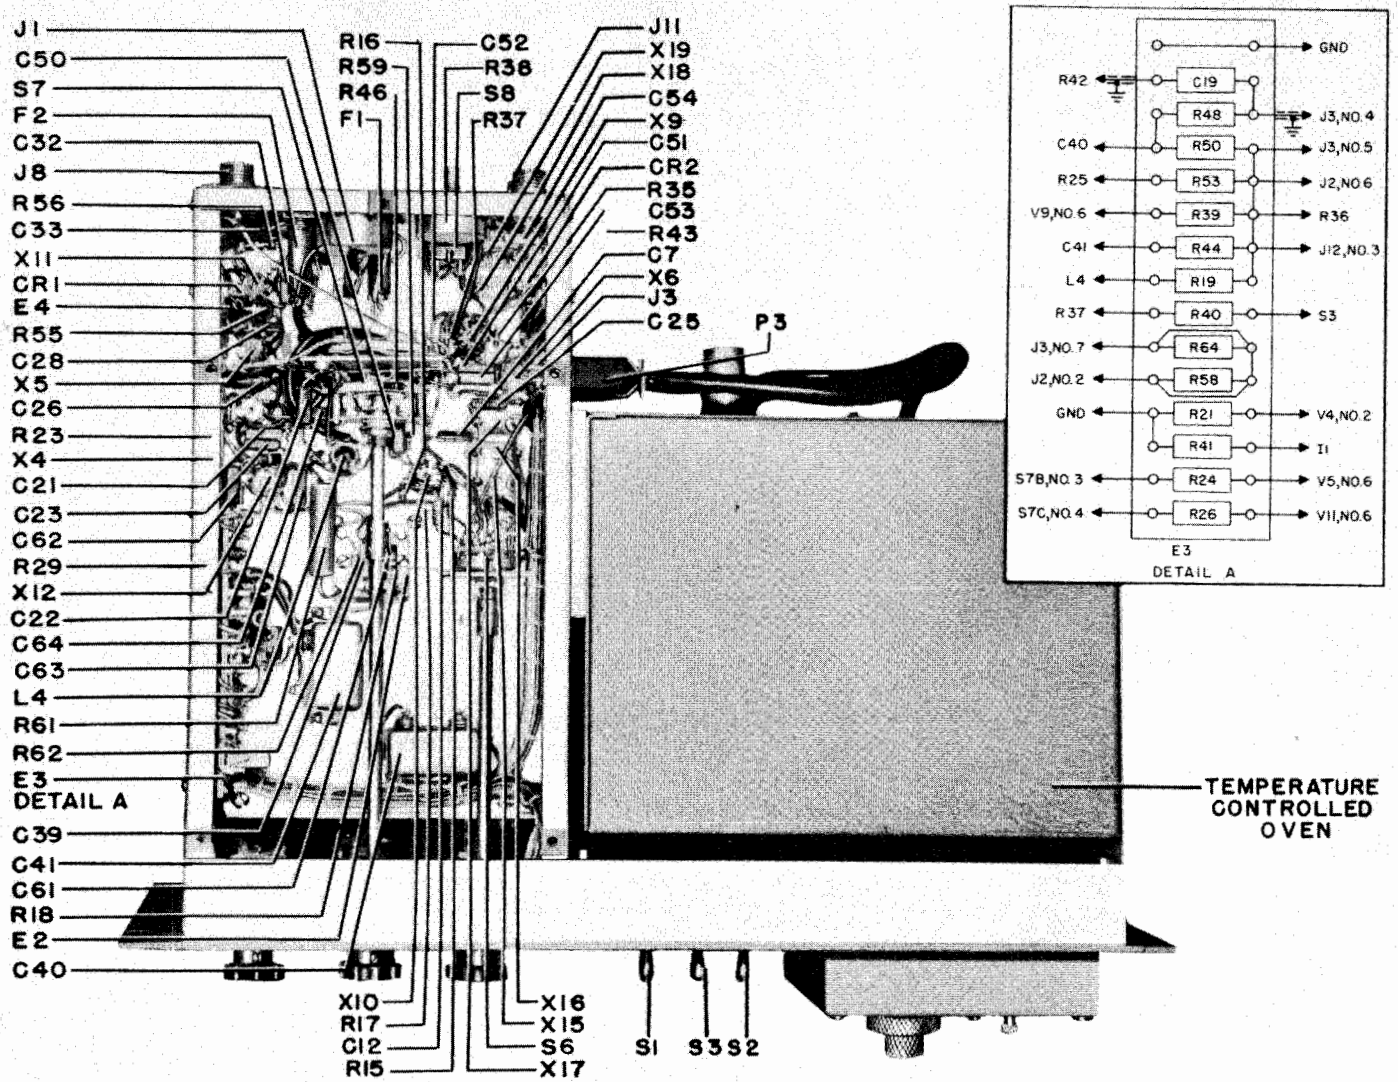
RF Oscillator O-165/UR, Bottom View, Location of Parts
